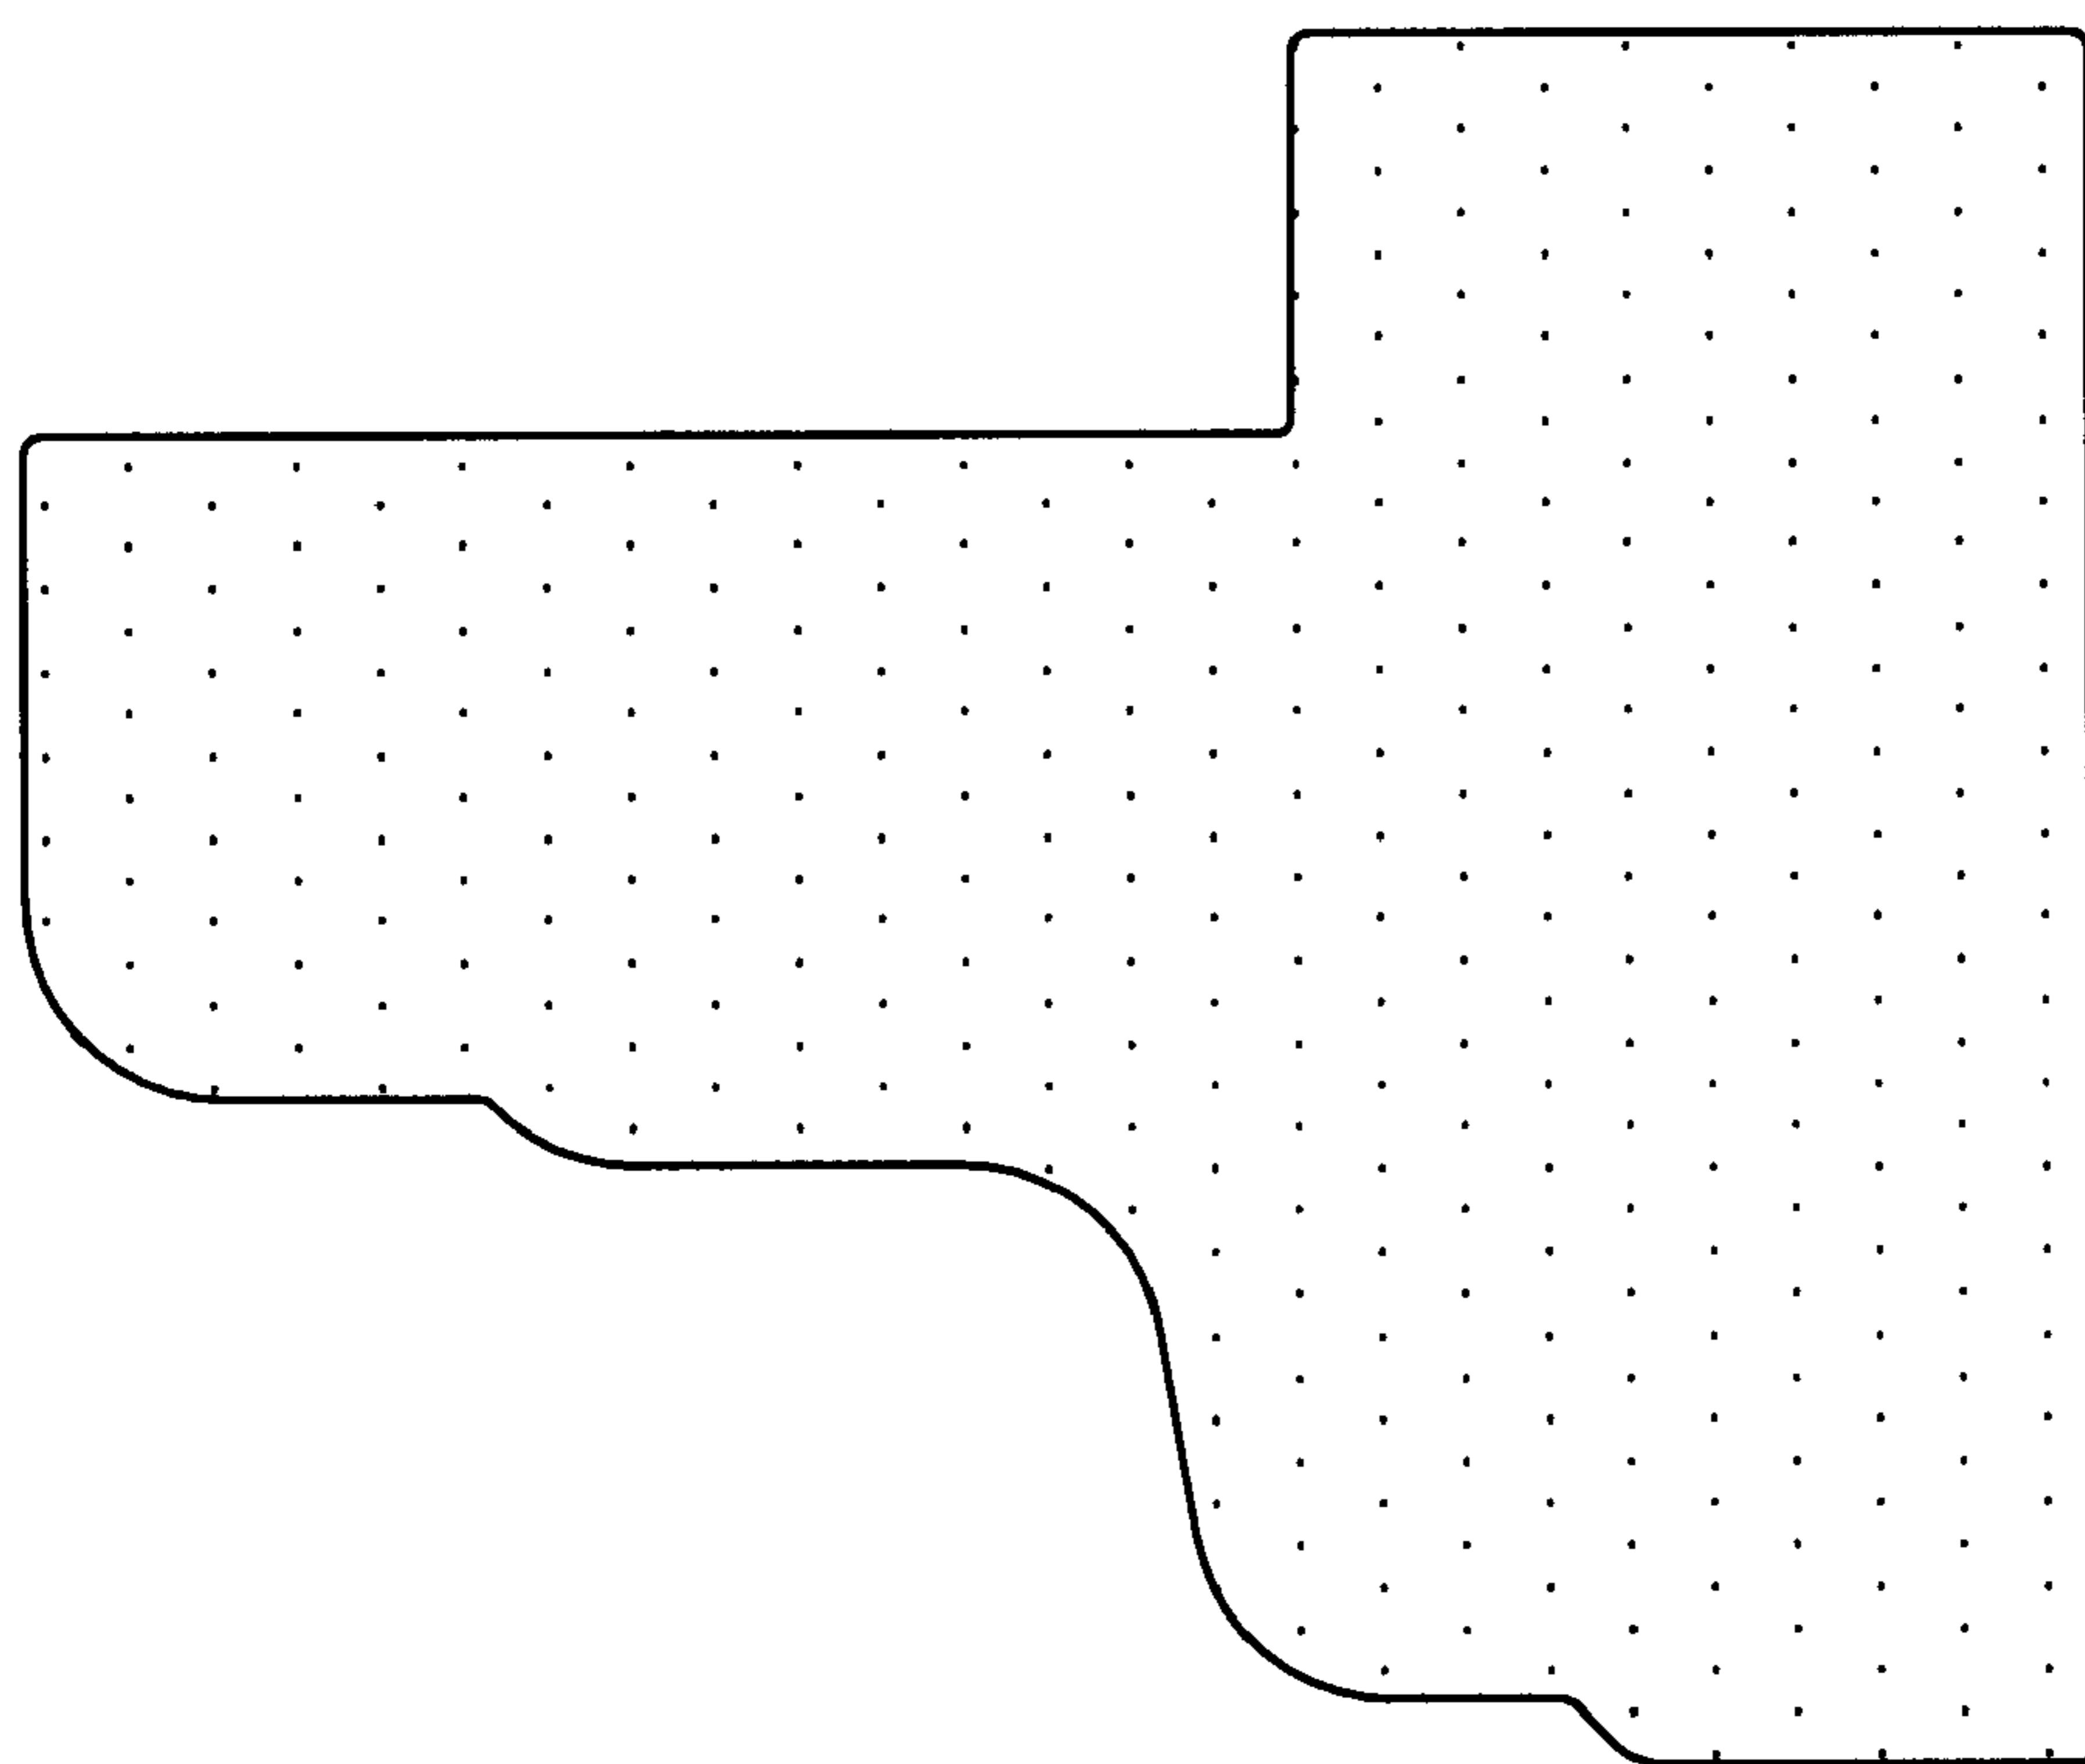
is a rear view of the extruded plastic window shutter outside mount frame molding.
